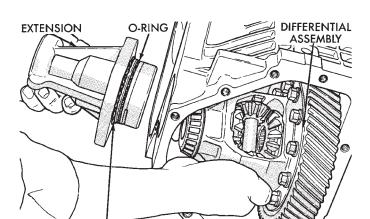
Differential and Extension (Front Wheel Drive Vehicles)
